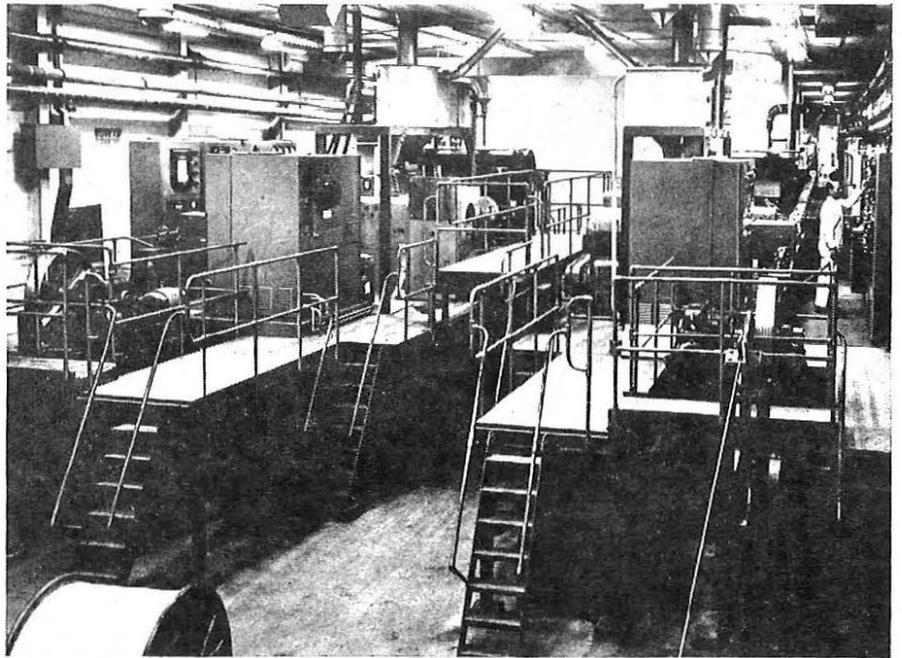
VIEW OF TYPICAL MANUFACTURING AREA FOR EXTRUSION OF CORE INSULATION.
